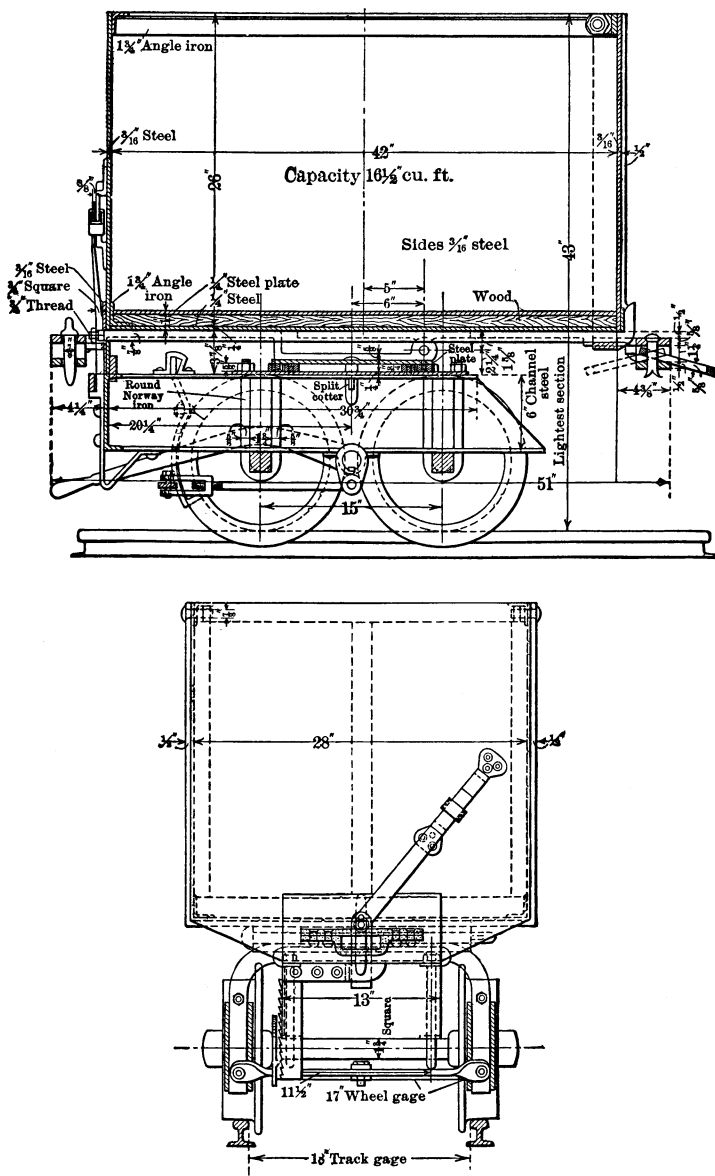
Tunnel car used in Laramie-Poudre Tunnel, side and end views.
